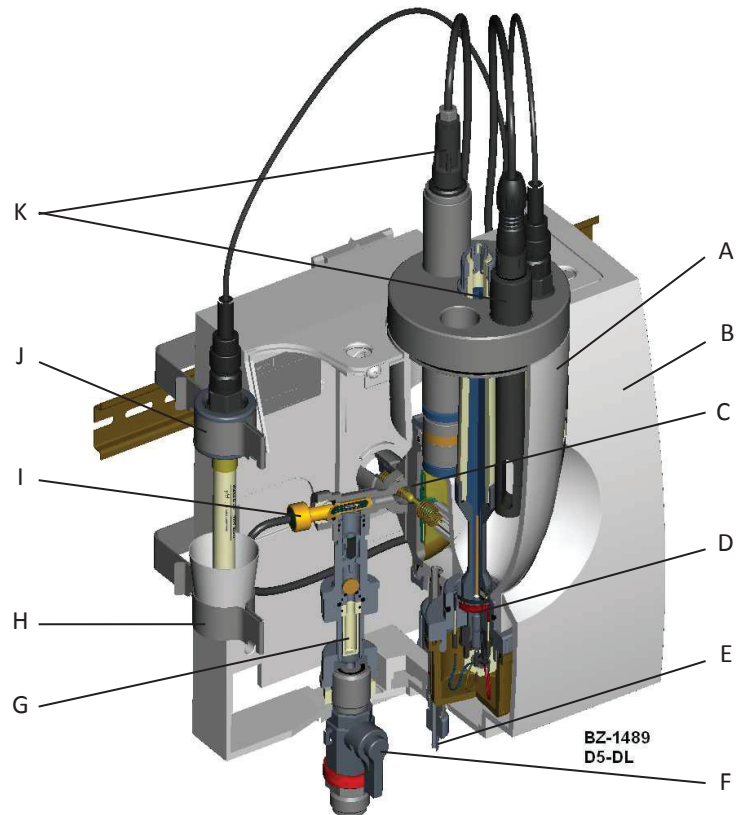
Depolox® 5 flow block assembly cutaway model
